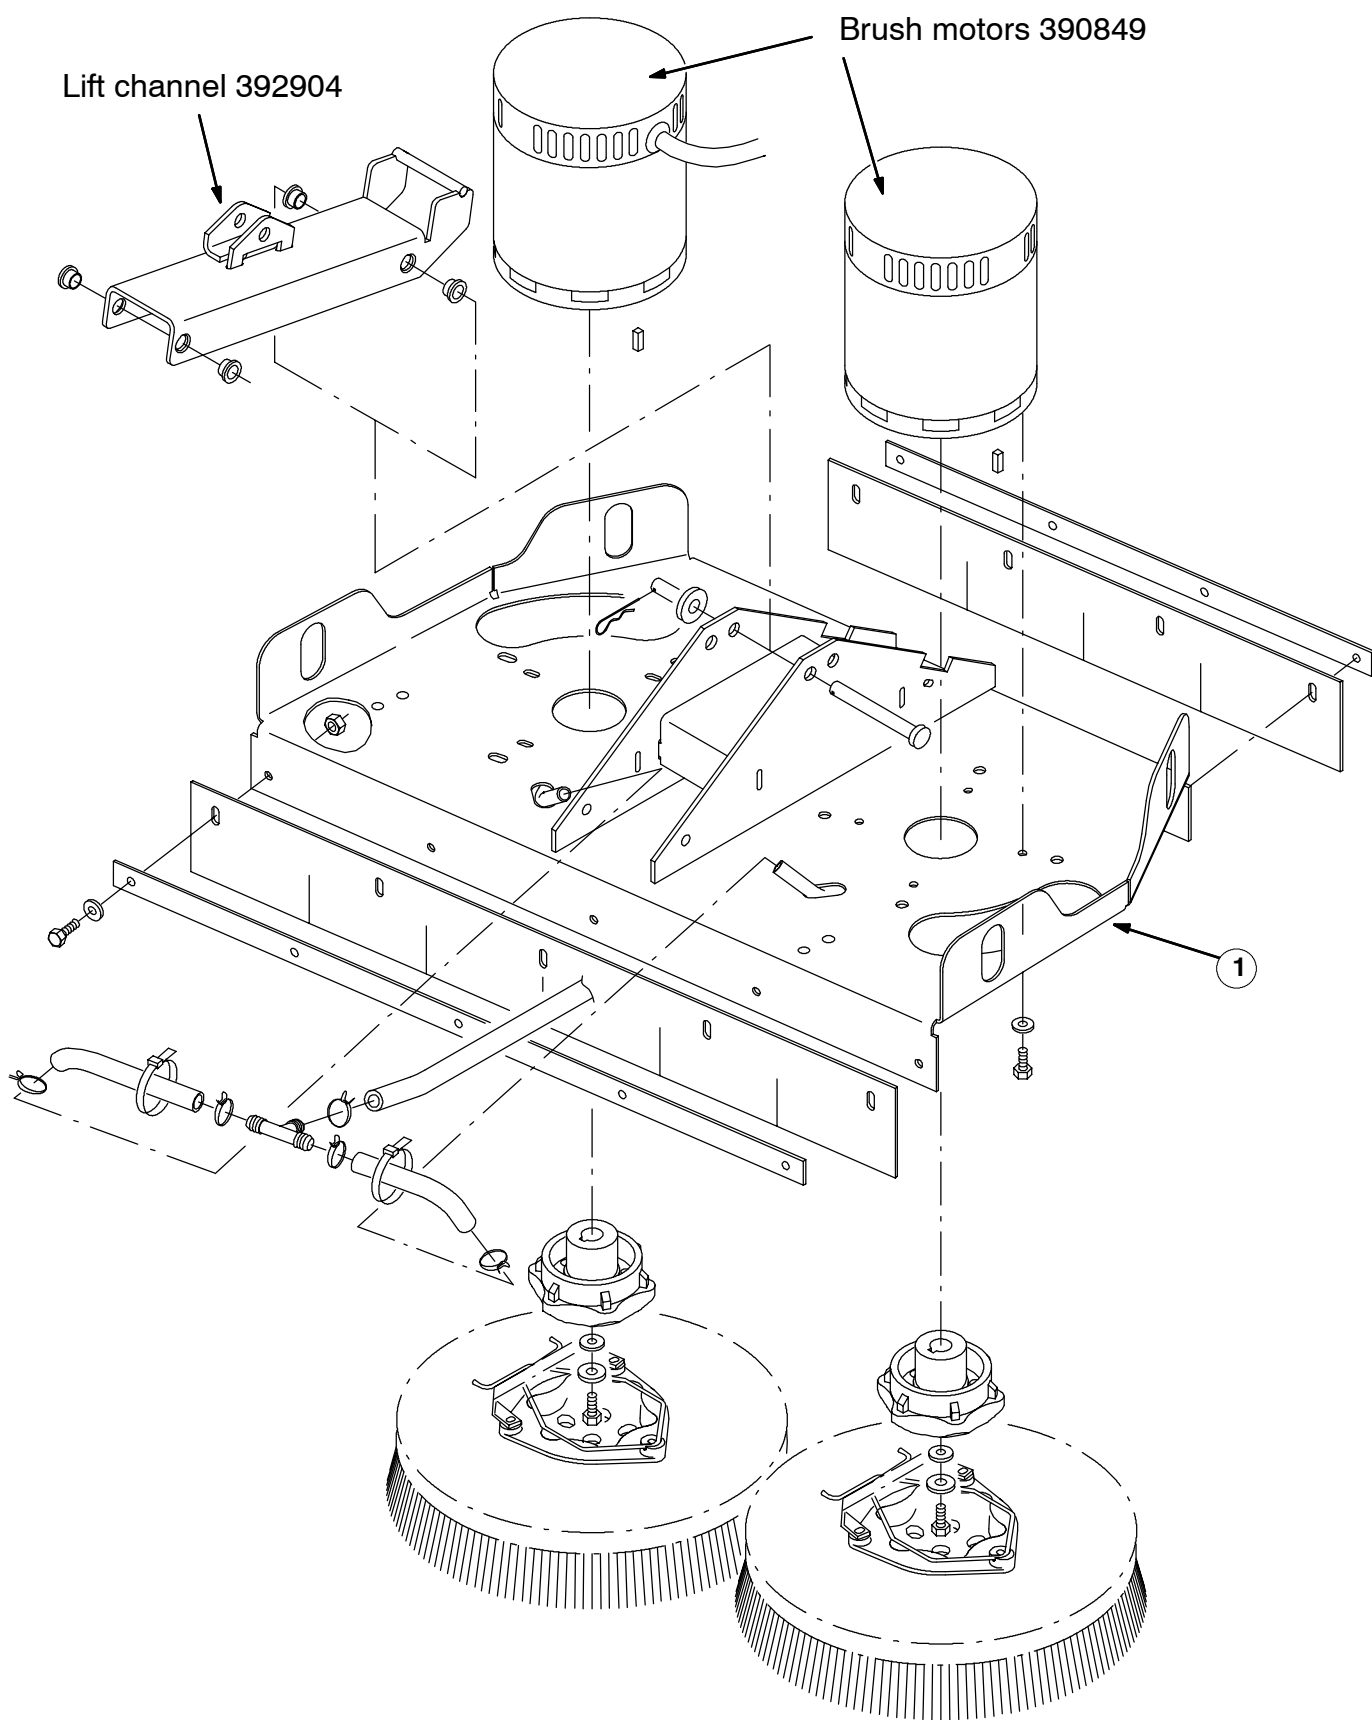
Disk Scrub Head Drive Motor Group, 700 mm (28 in)
